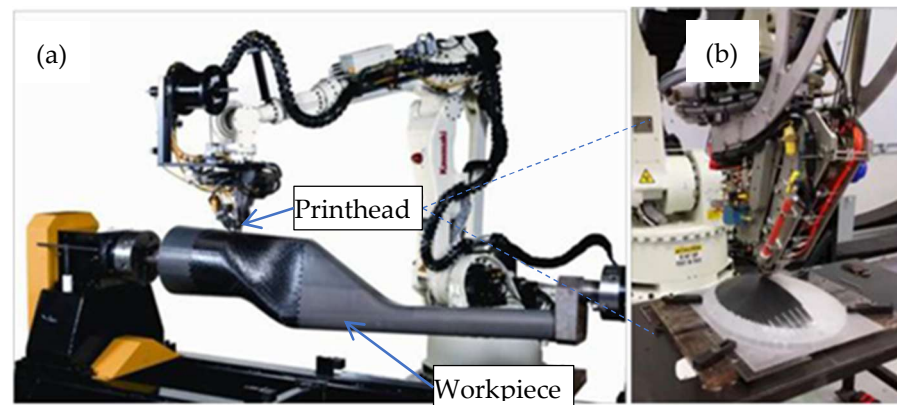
Representative equipment for thermoplastic wire laying: (a) overview, (b) printhead [74].
